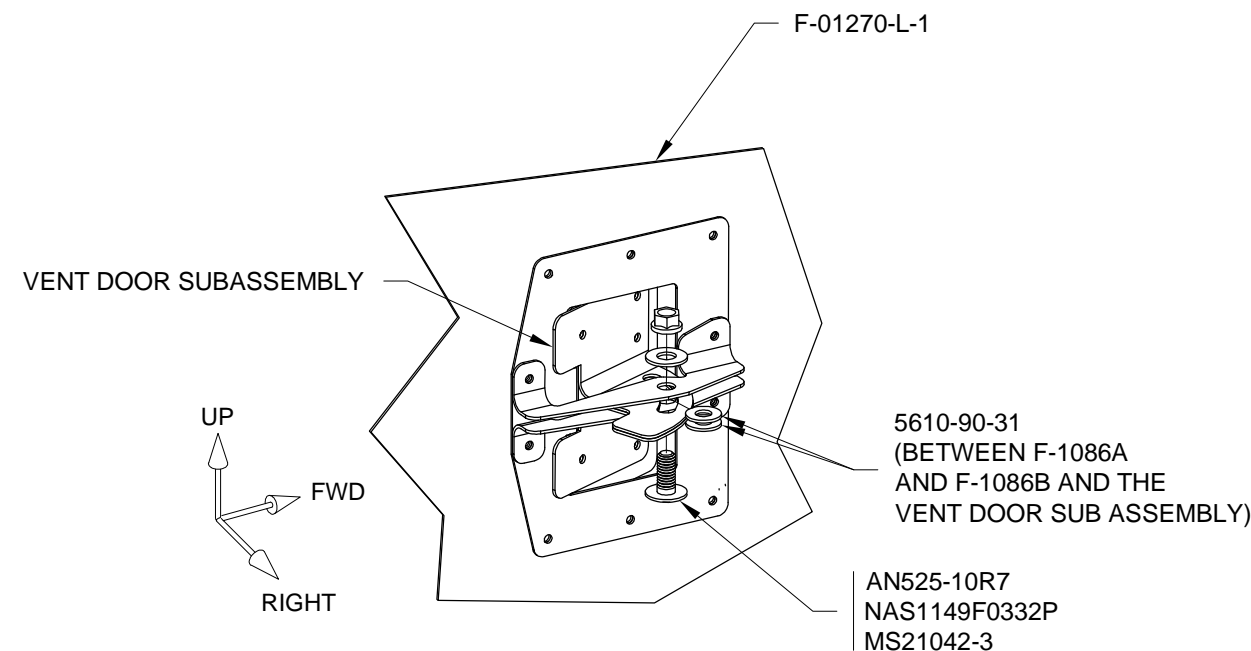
INSTALLING THE VENT DOOR SUBASSEMBLY
